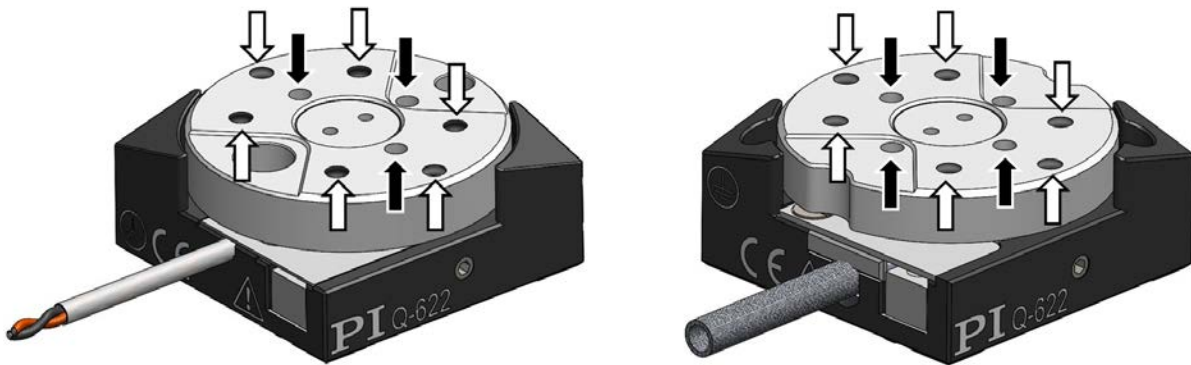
Left: Q-622.900 (platform hole pattern of the Q-622.90U is identical), right: Q-622.930; the black arrows indicate the locating holes for aligning the load; the white arrows indicate the threaded holes for mounting the load
